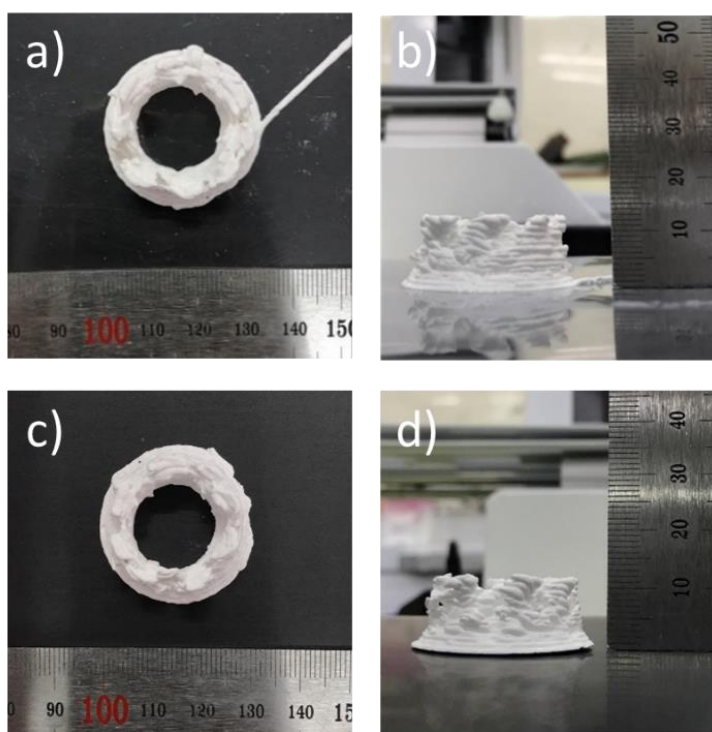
Printed samples after improving ink paste with 1wt%HEC and 10wt%PEG1500; a) after printing (top view), b) after printing (side view), c) after sintering (top view), and d) after sintering (side view)
